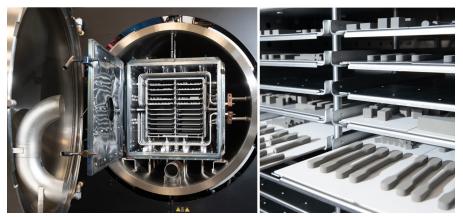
Furnace used for sintering steel items, and detail of alumina trays holding samples
